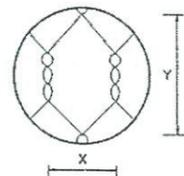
WIRE MESH DIMENSIONAL LAYOUT
